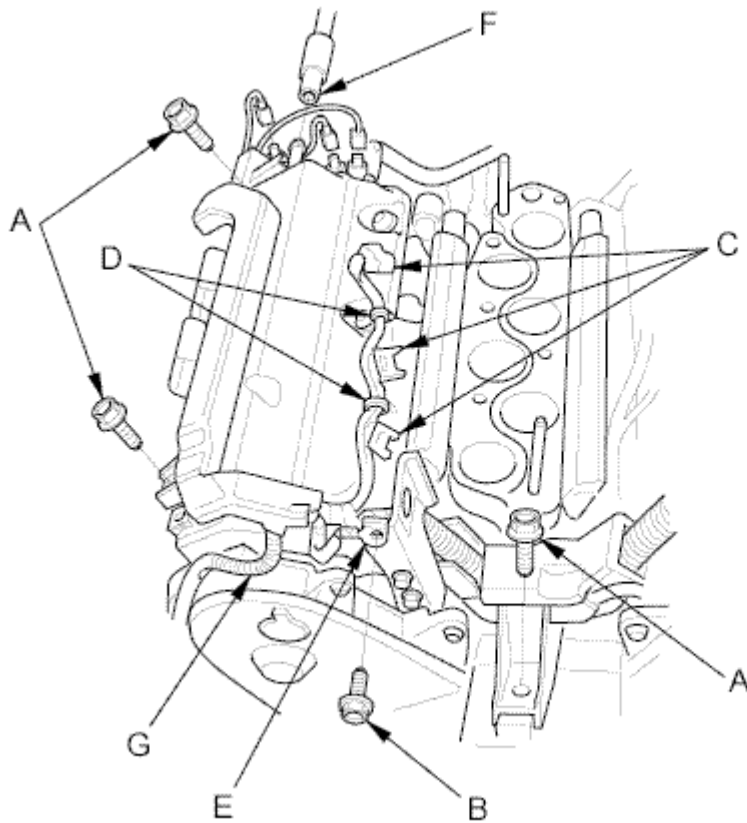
Removing Rear Cylinder Head Engine Ground Cable
